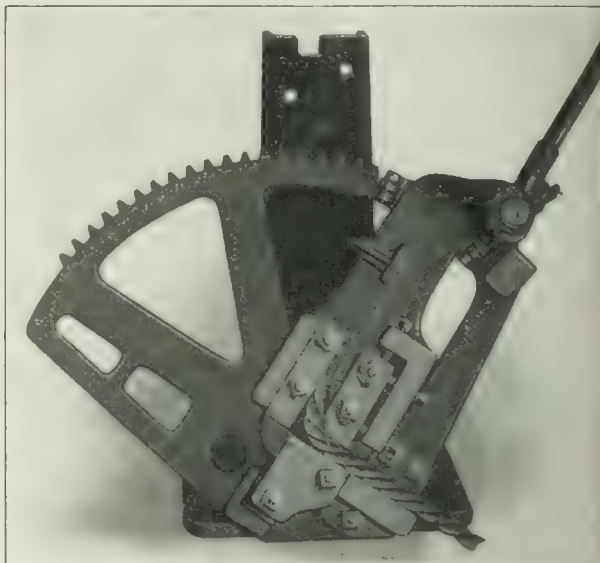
The Machine Removed from Its Pedestal, Showing a Top View of the Working Parts.
